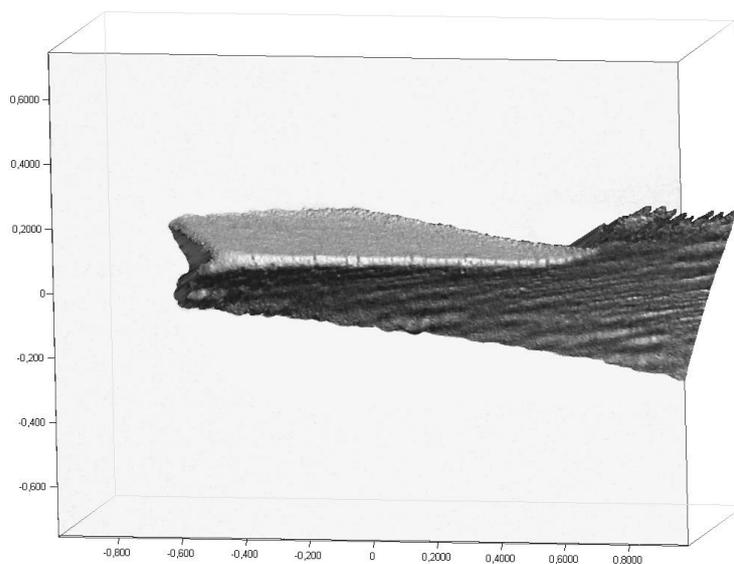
Cutting edge of a tap drill after eight minutes' treatment in a DF Series drag finishing machine.
